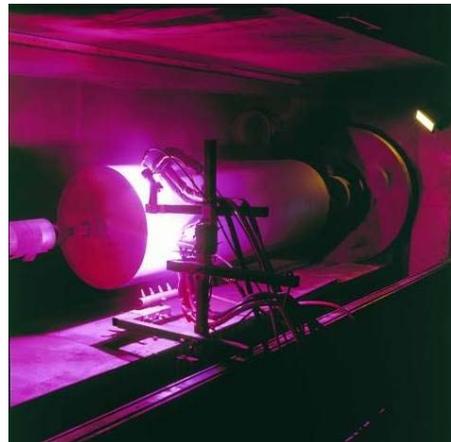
The uncovered spots inside and outside of this pinion gear drive will be thermal coated, sanded and burnished.
